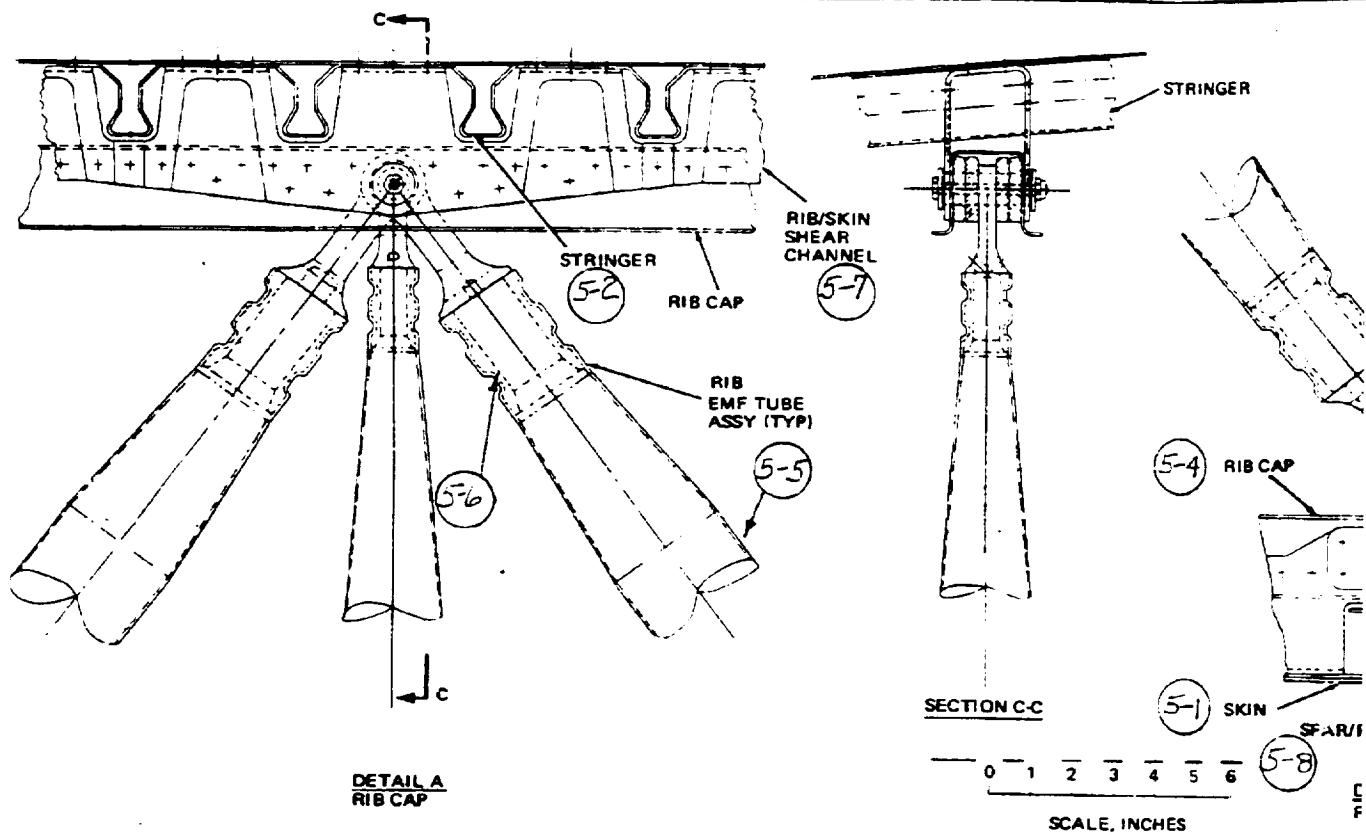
Wing Structure Subsystem Structural Arrangement
